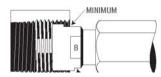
Gaging internal American National Taper pipe threads with working gage. When the internal thread is chambered, the gaging point shall be the intersection of the chamber and the pitch cone of the thread.
